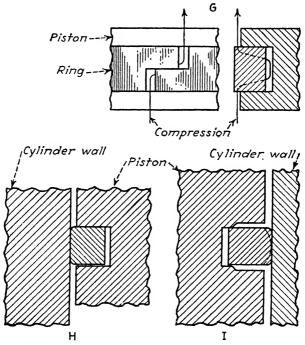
Ordinary step-joint leakage path G. Groove shoulders wear the ring face round I. (Courtesy of Power.)
